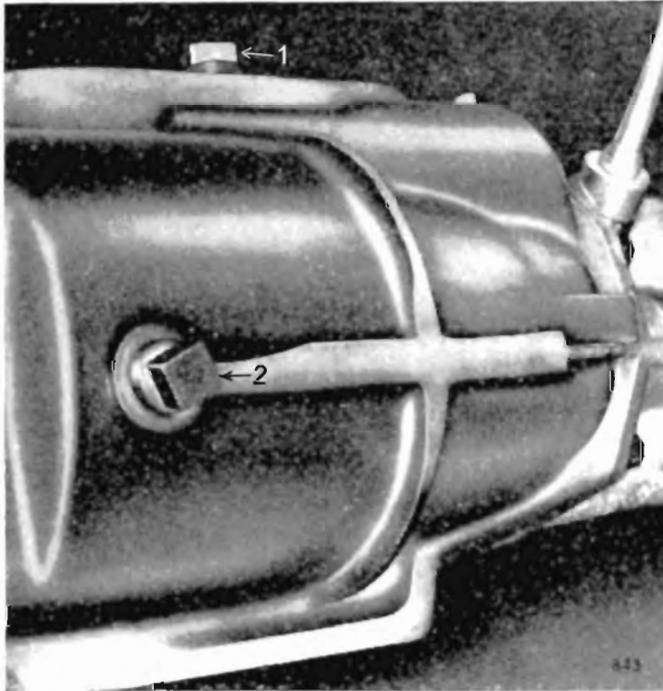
Gearbox oil filler level plug (1) and drain plug (2).
